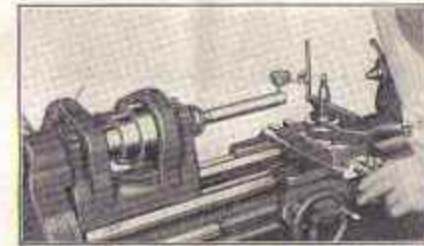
Testing Alignment of Headstock Spindle with Lathe Bed Using 6-inch Test Bar and Dial Indicator
